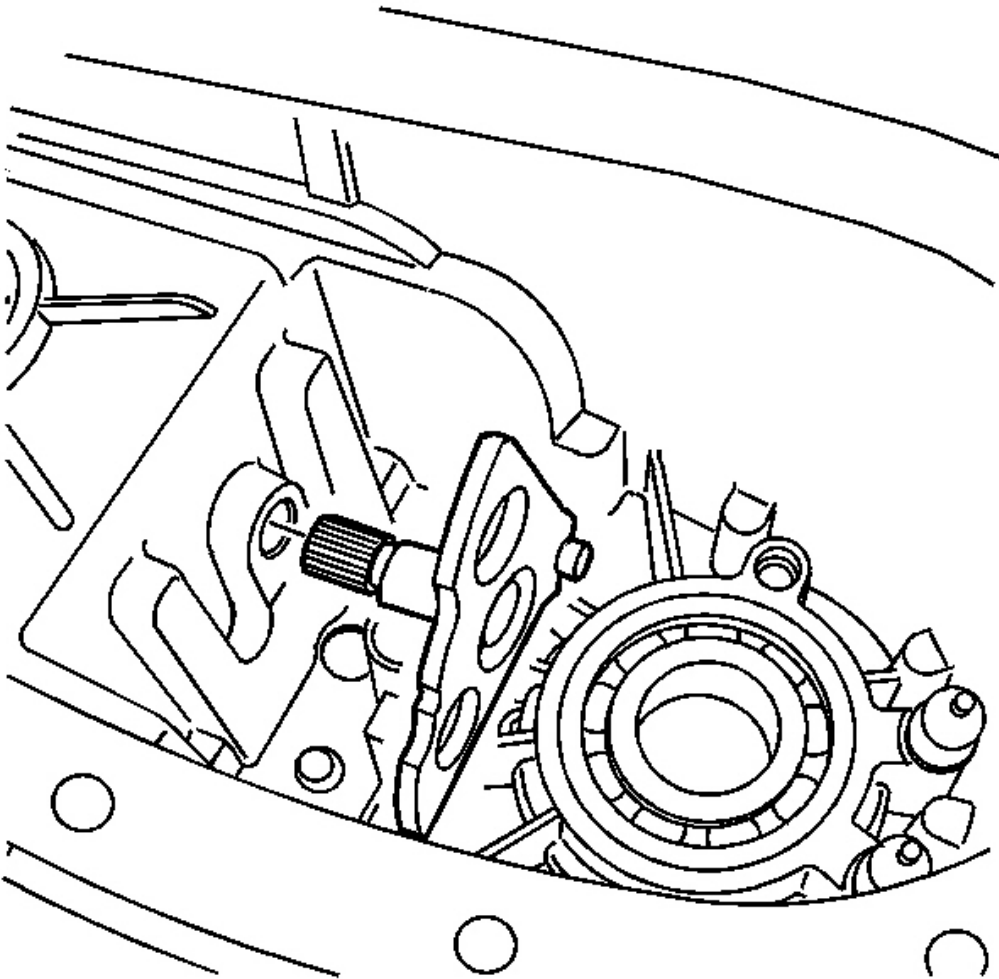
Installing The Front Output Shaft Rear Bearing Into The Rear Case Half
